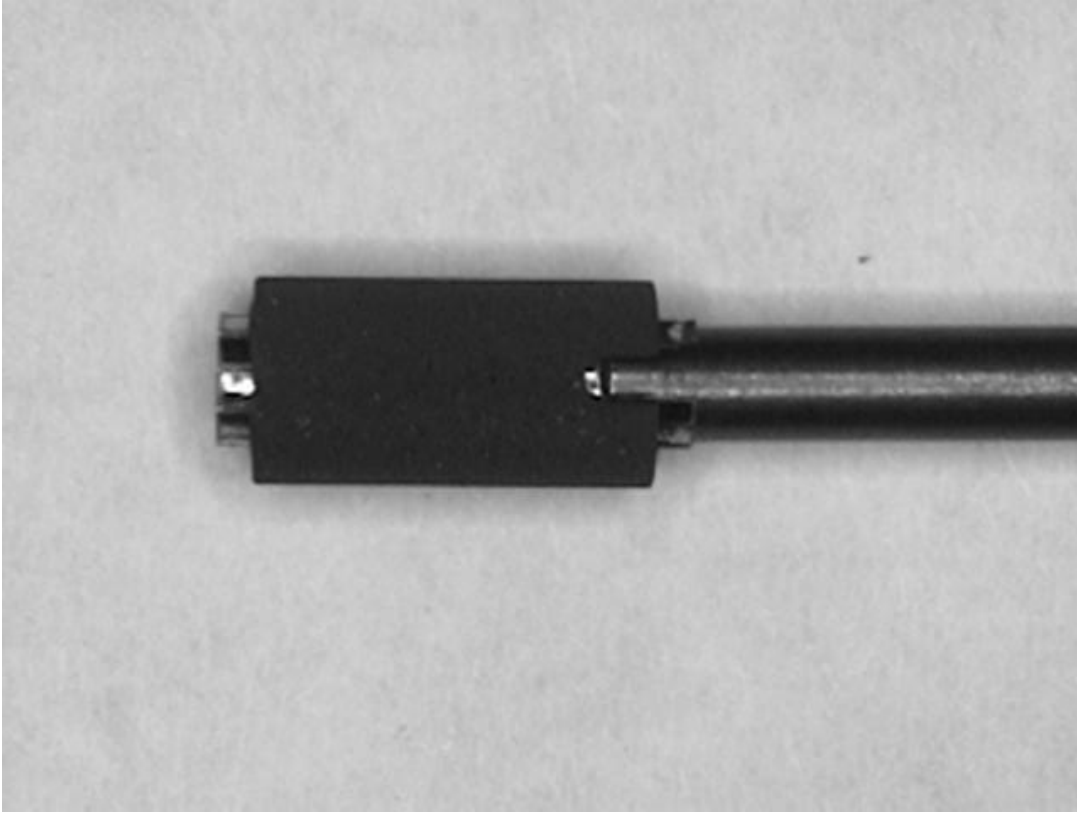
#40 drill blank (left) and #36 stainless steel bushing (right).
